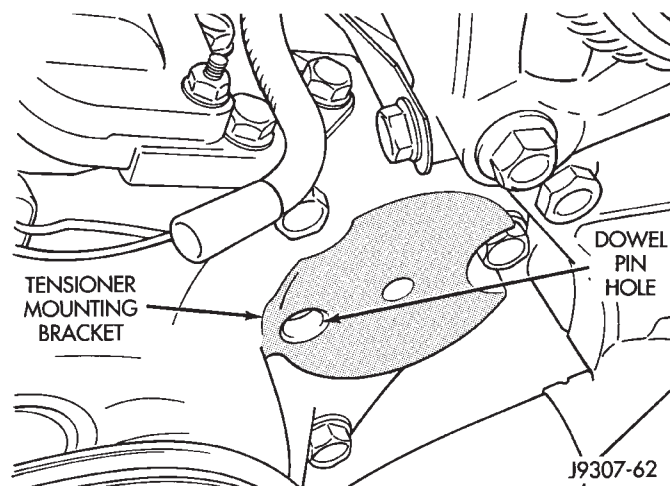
Tensioner Mounting Bracket Dowel Hole—5.9L HDC-Gas Engine
